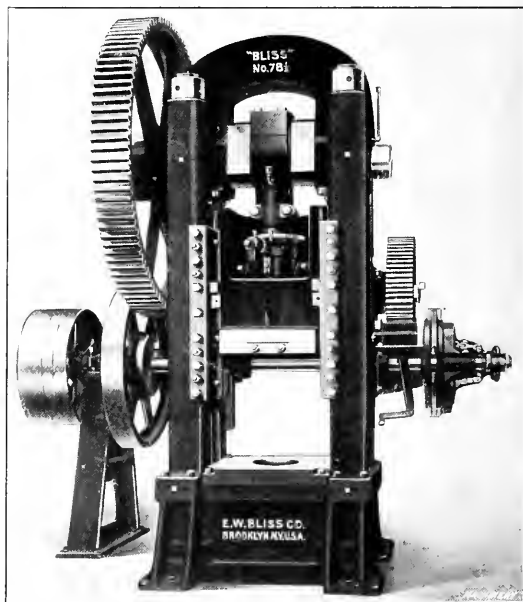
Bliss No. 78½ Press used in making Automobile Clutch Cone
